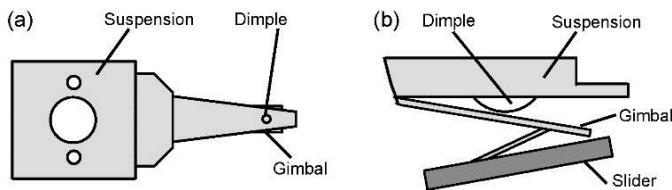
The suspension assembly of HDD: (a) top view, and (b) side view [15]
